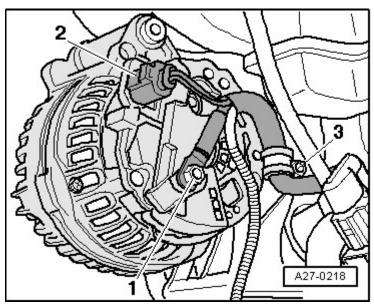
Identifying Connector, Electrical Wire And Wiring Clamp On Generator
